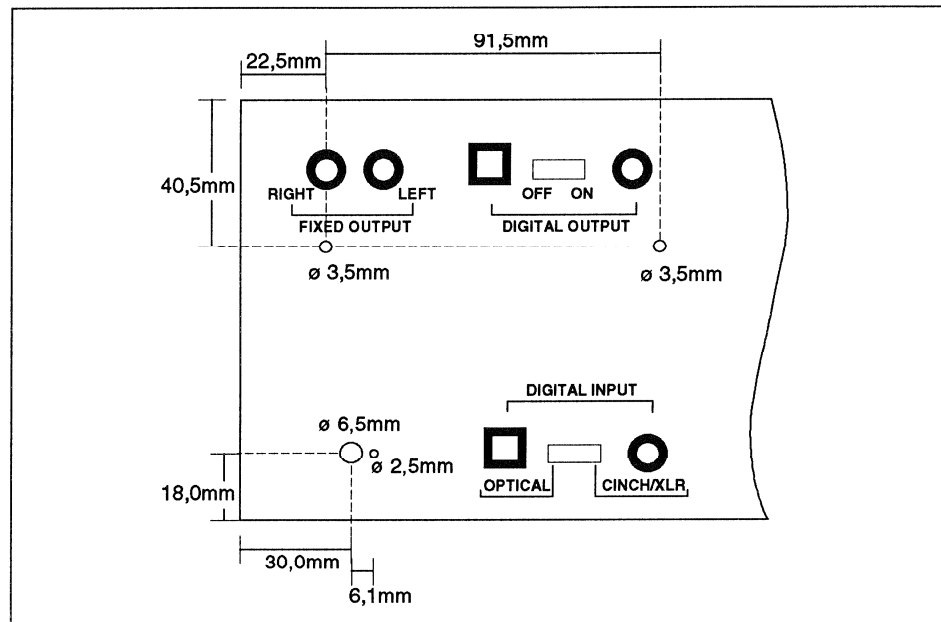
Mounting holes in the rear panel of the D740 and drill holes for the new switch.
